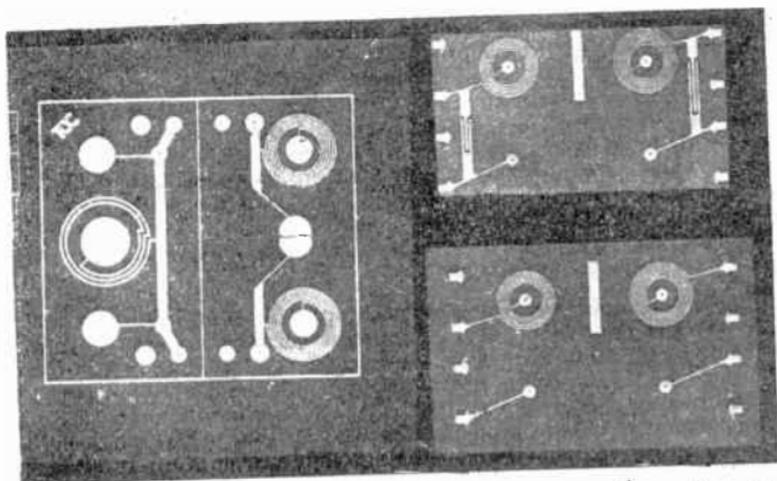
PRINTED COMPONENTS—NOTE PRINTED CAPACITOR ON RIGHT-HAND SIDE.
